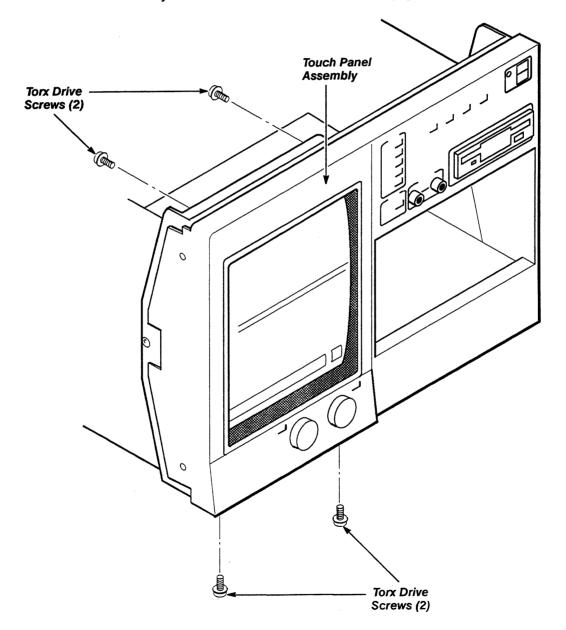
Removing/Replacing the A9 Touch Panel Assembly Torx Drive Screws
